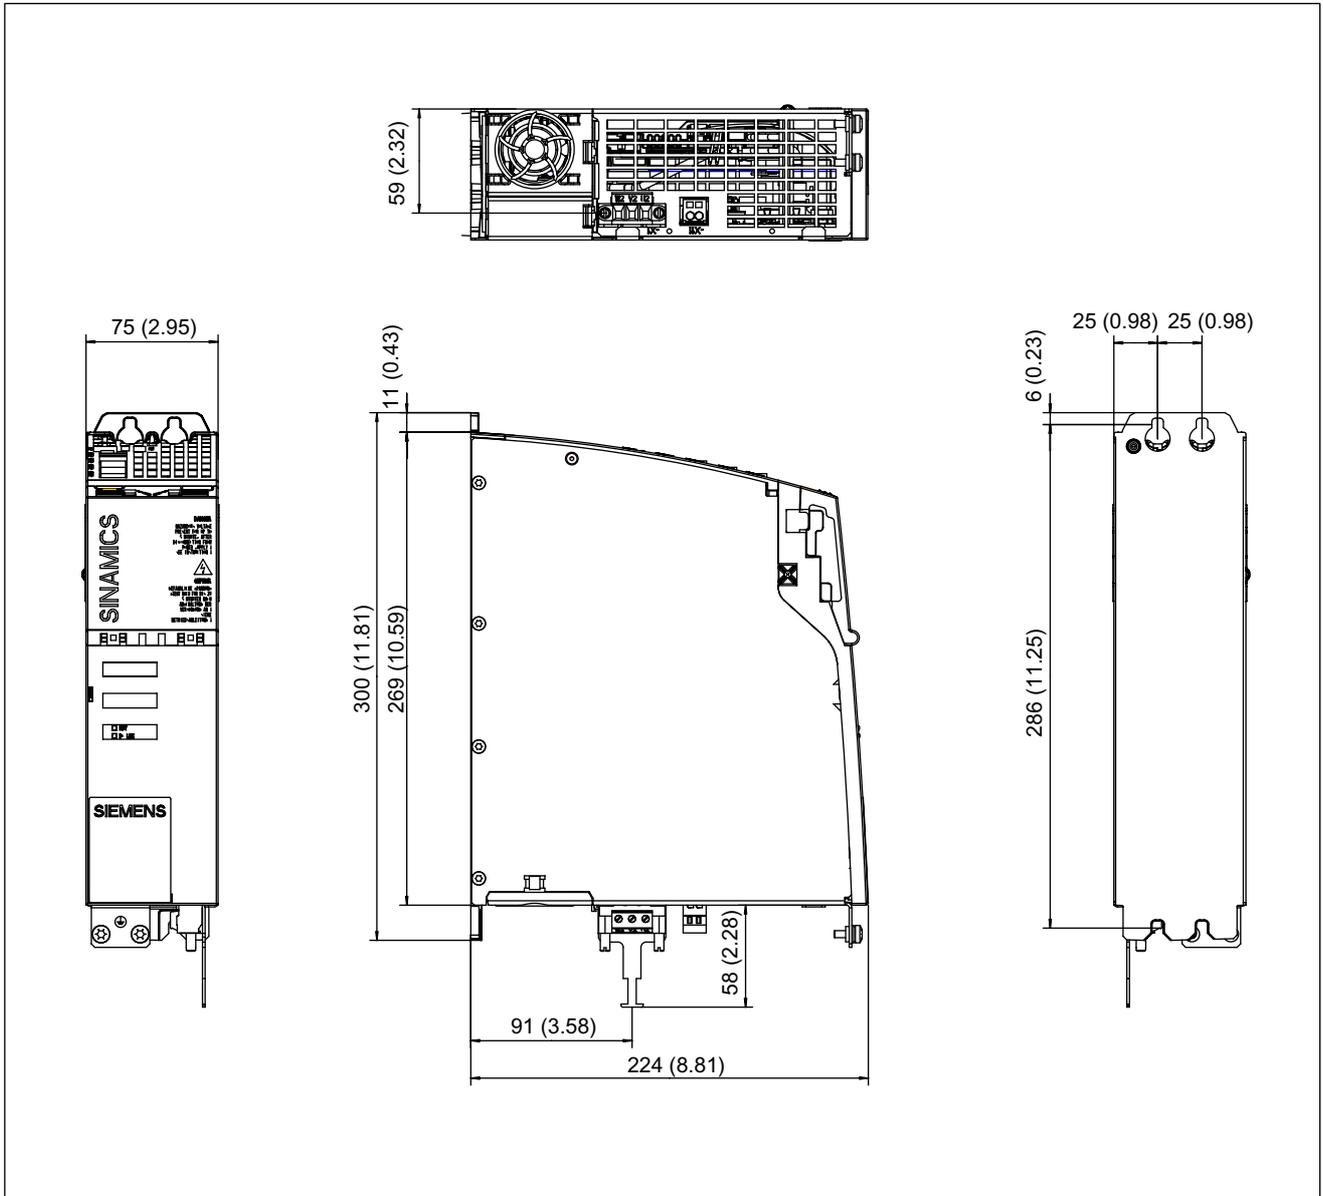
Dimension drawing of Motor Module in booksize compact format 18 A, all dimensions in mm and (inches)
